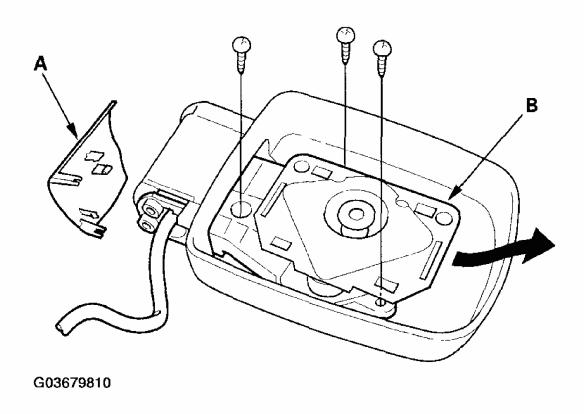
Removing The Cover And Actuator Courtesy of AMERICAN HONDA MOTOR CO., INC.
